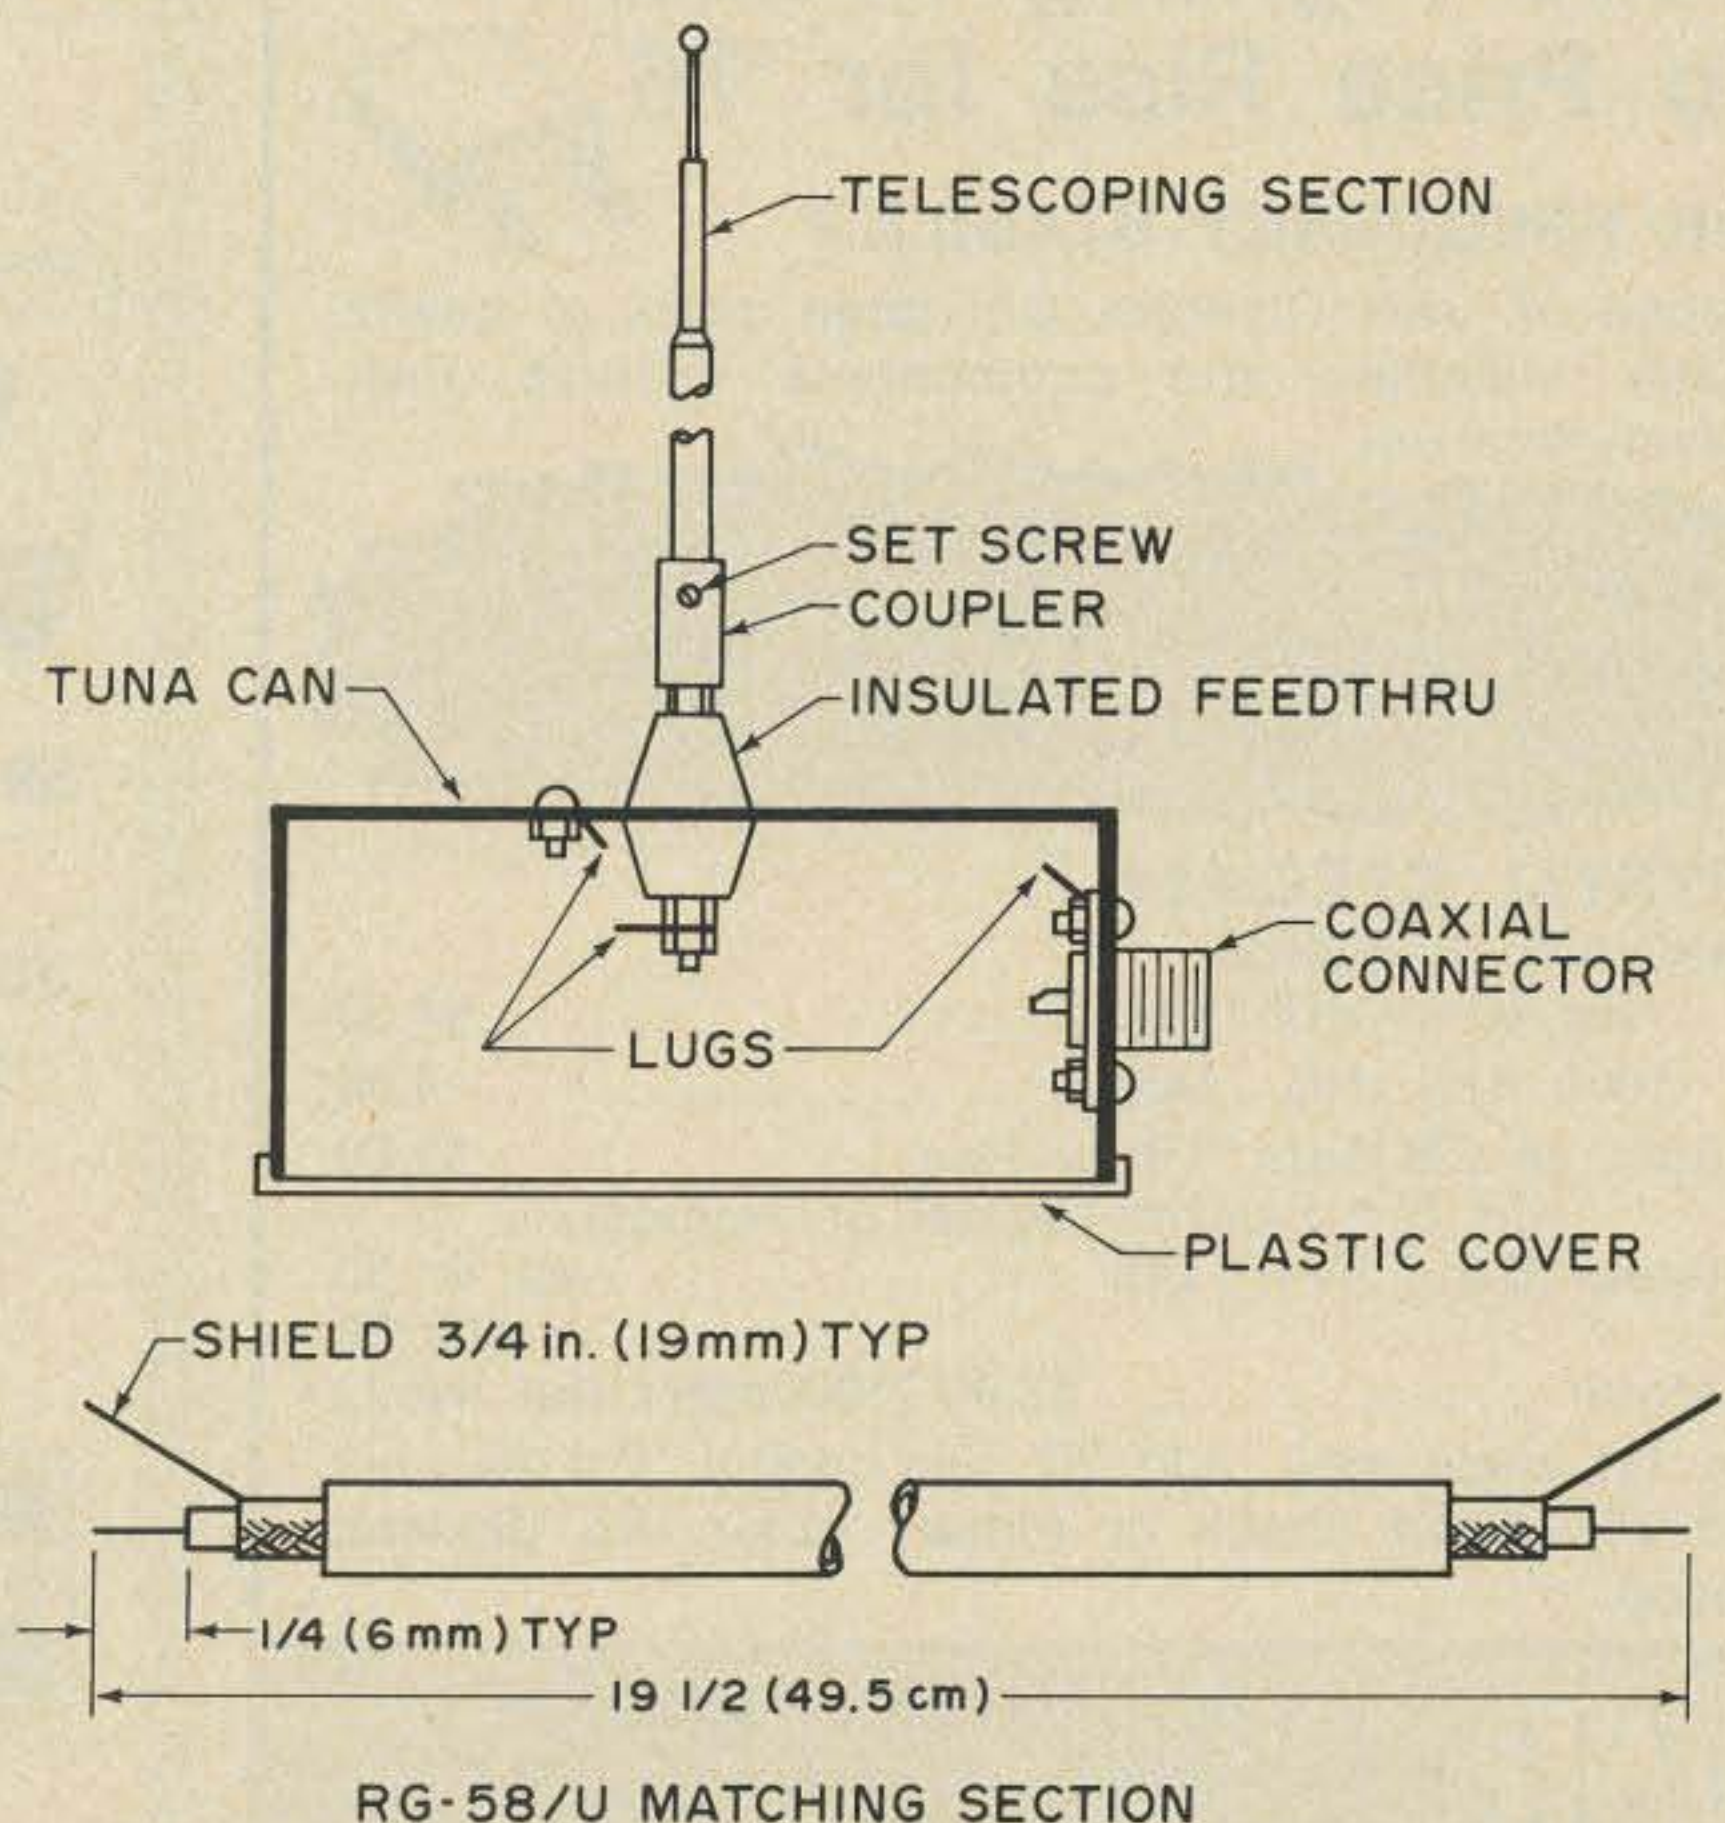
Assembly. Center conductor is soldered to feedthrough lug and coax connector center.
